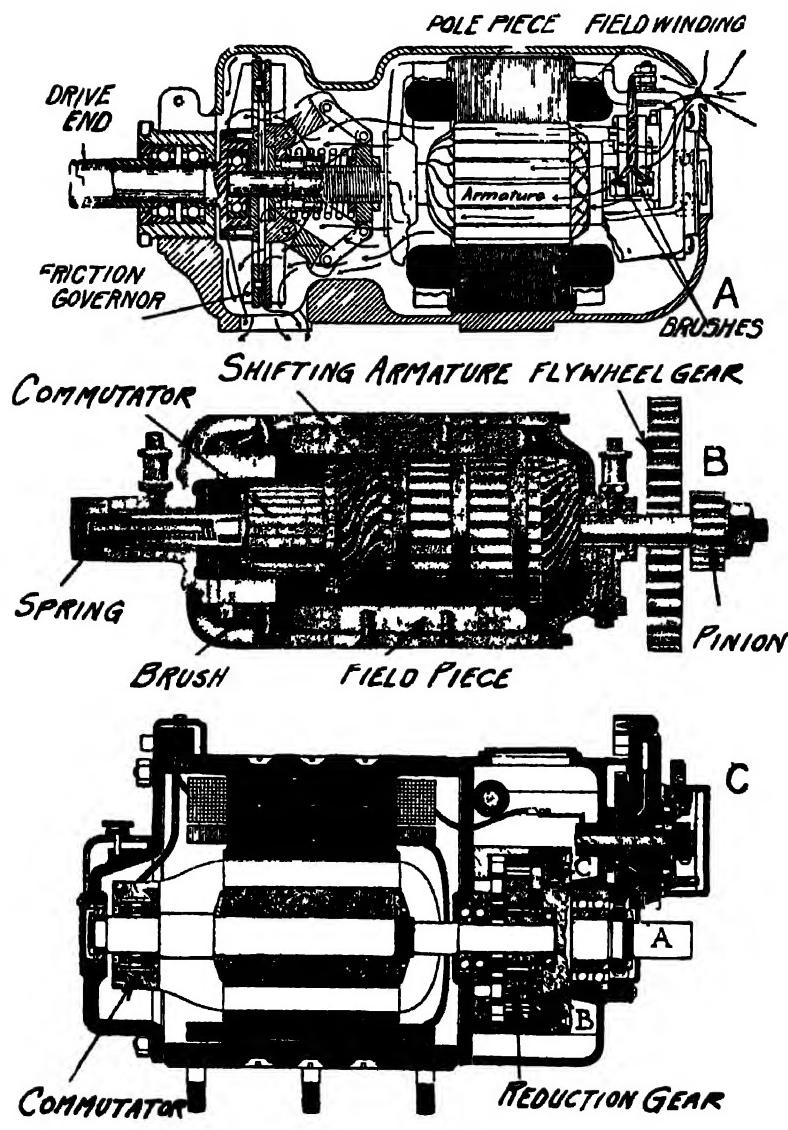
Showing Construction of Typical Generators and Starting Motors
